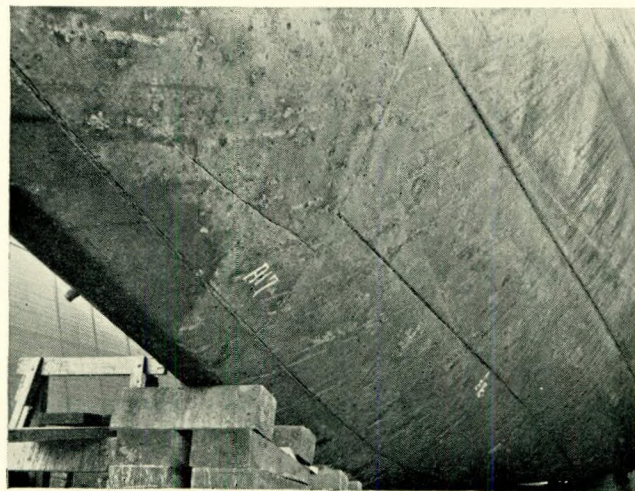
HEAVY CORROSION OF HAND-WELDED SEAMS (SEE APPENDIX II, CASE B)
